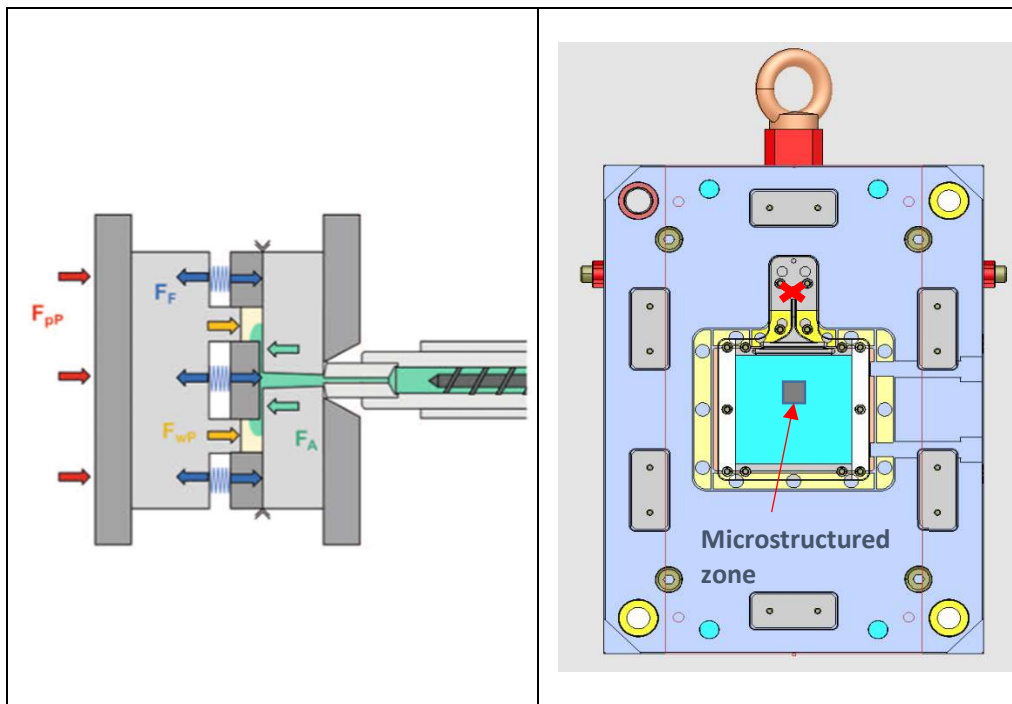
Compression-springs based ICM mould used and diagram showing the specific forces involved in the process (left) – Image credit: [6]. CAD drawing of the mould half containing the microstructure in its top section (right) – EURECAT
